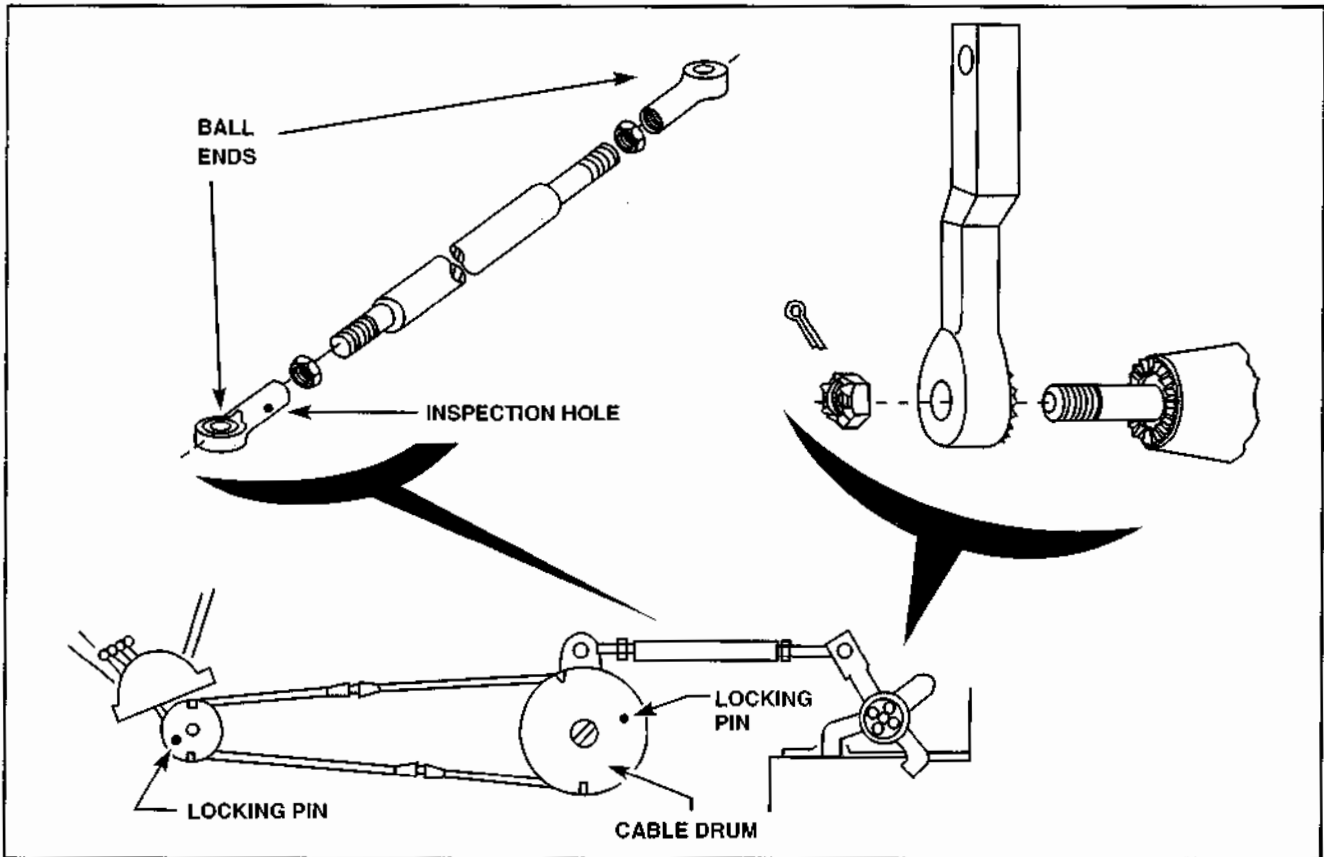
When adjusting a throttle control system that uses cables, pulleys, and a drum, it is important that you follow the manufacturer's instructions. Whenever rod-end bearings (ball ends) are used, you should check to ensure that the terminal is adequately threaded into the rod-end. This is accomplished by determining that the terminal threads extend past the rod-end inspection hole.
